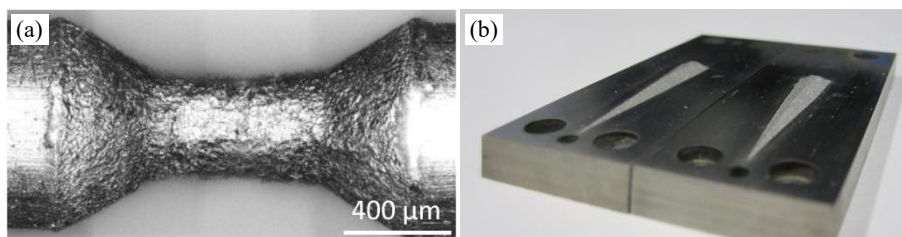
(a) Stepped shaft micro product manufactured by MCWR with (b) a pair of flat wedges.
